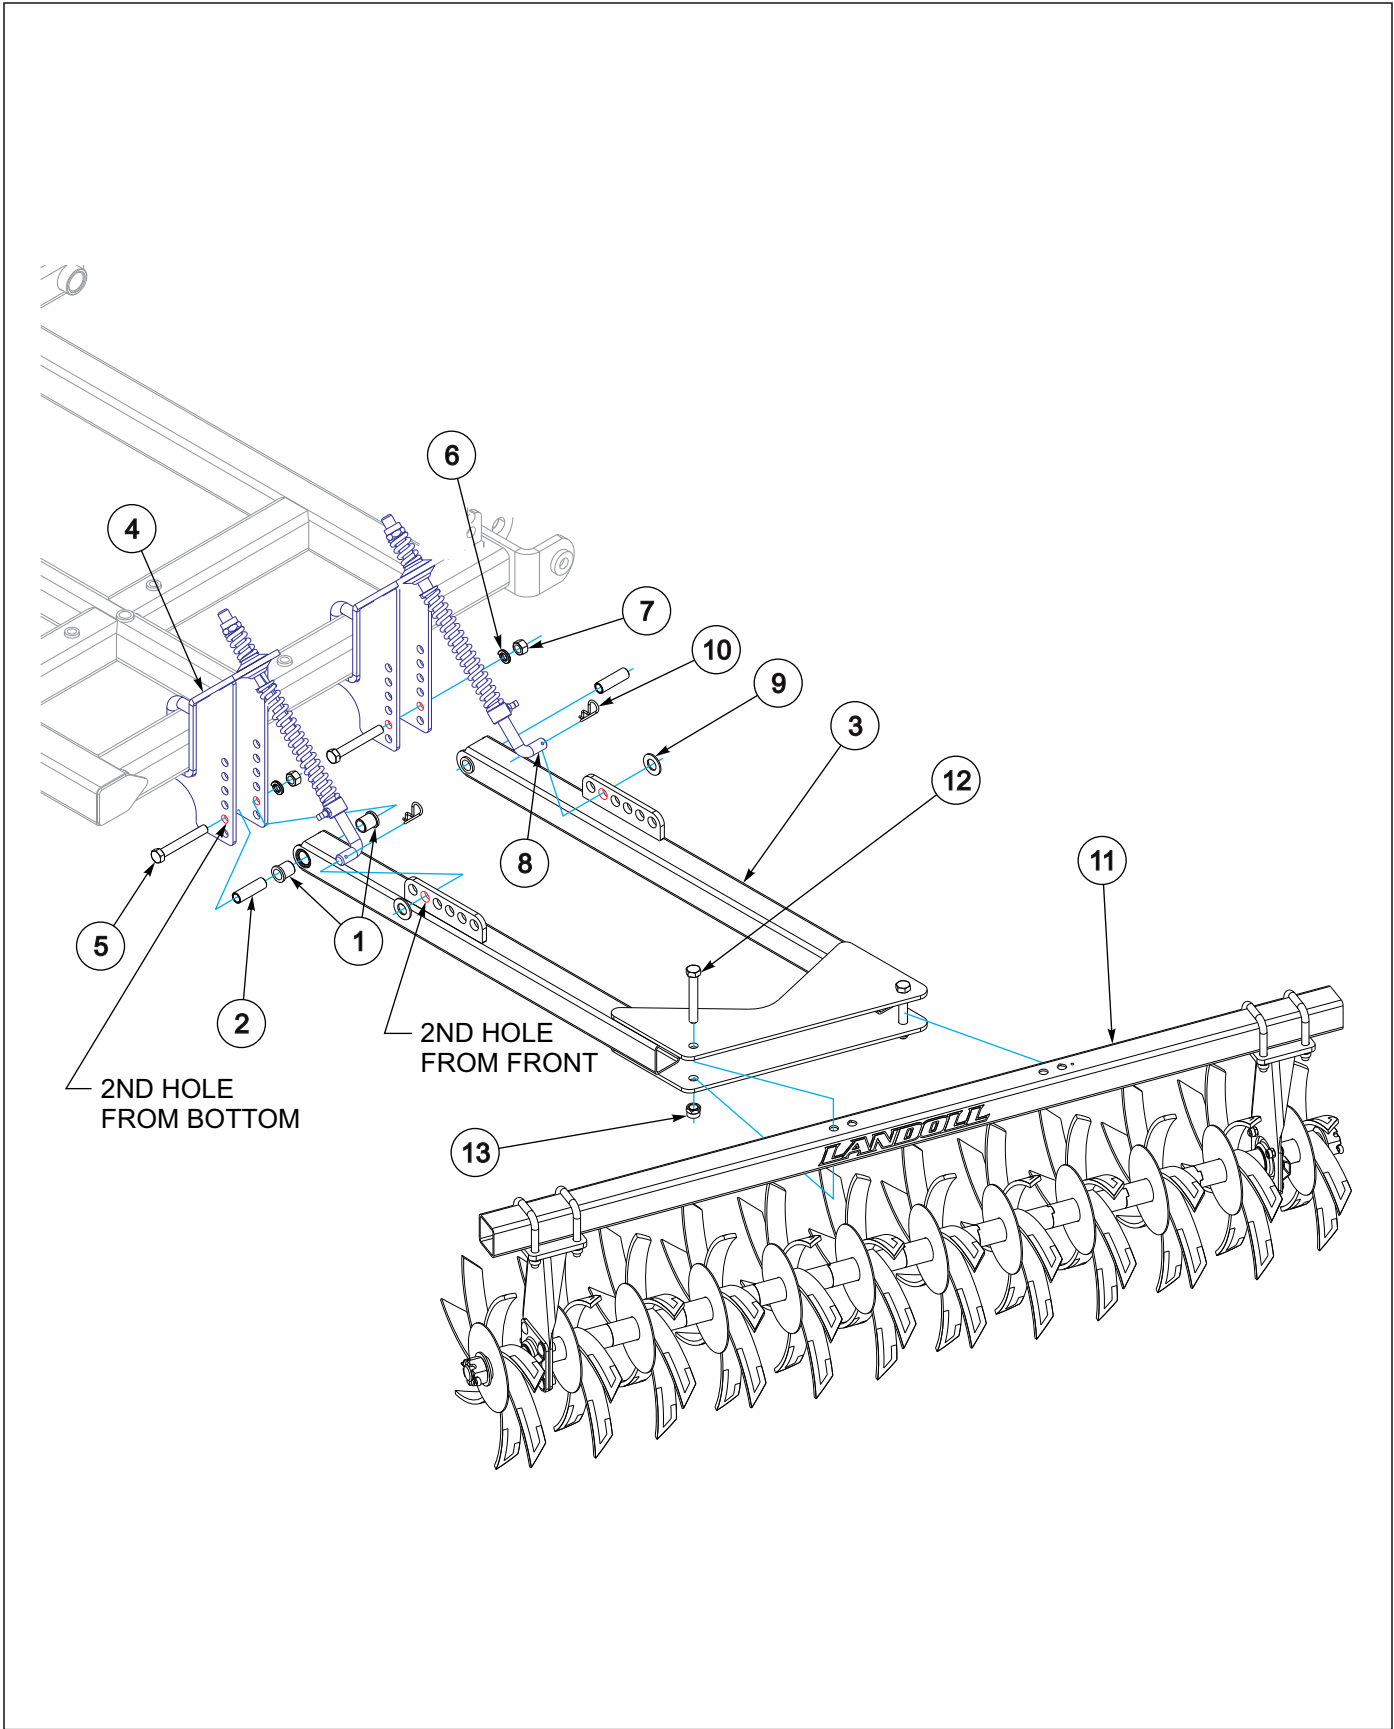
Treder Arm & Reel Assembly (Standard)
